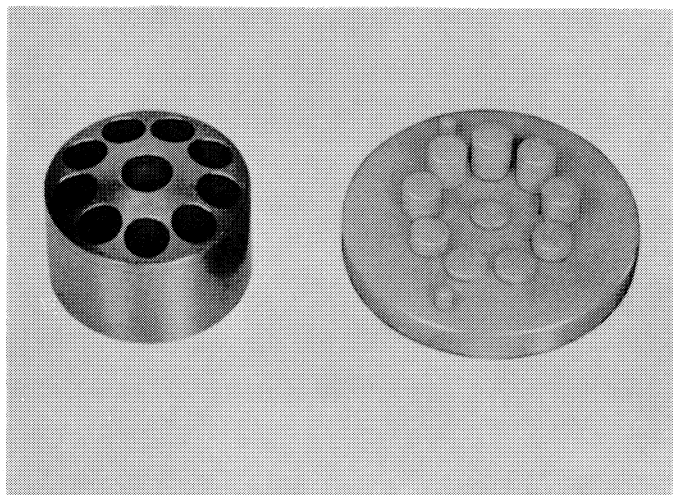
Driven Cylinder Block and Assembly Fixture, Tool No. N3 10776
